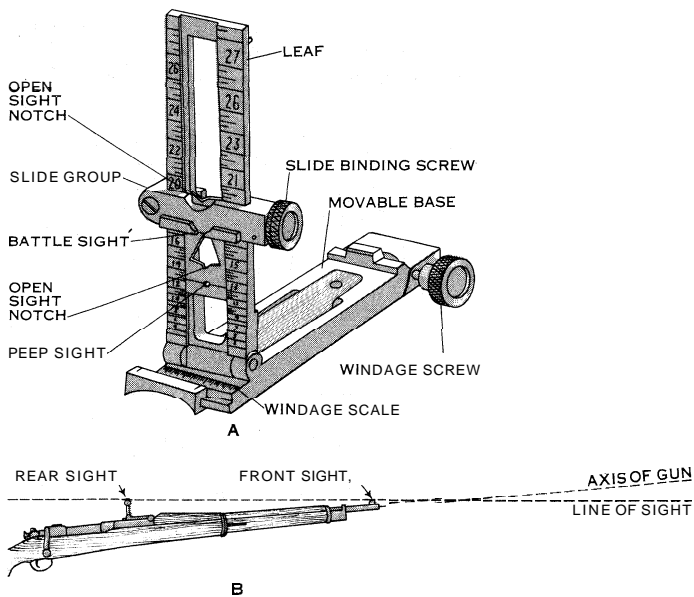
RIFLE AND MACHINE-GUN SIGHTS: (A) CLOSE-UP VIEW OF LEAF SIGHT; (B) ARRANGEMENT OF RIFLE SIGHTS
